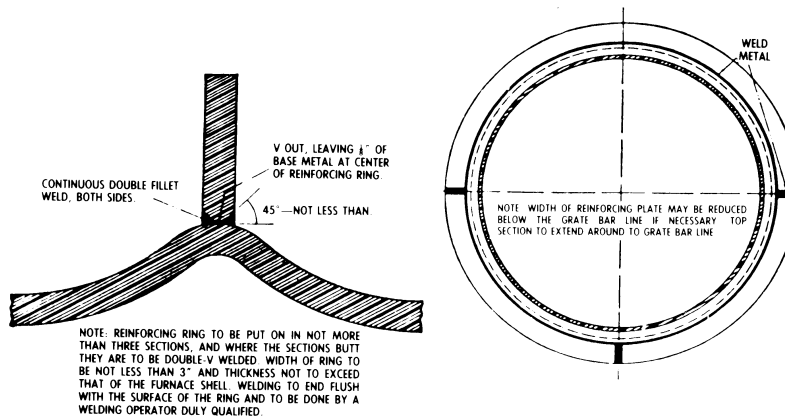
APPROVED METHOD OF REINFORCING FURNACES BY MEANS OF ARC OR GAS WELDING
